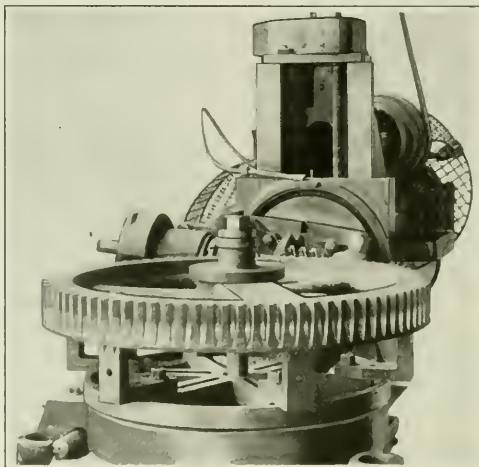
Hobbing a 90-tooth Spur Gear of 3 Diametral Pitch
